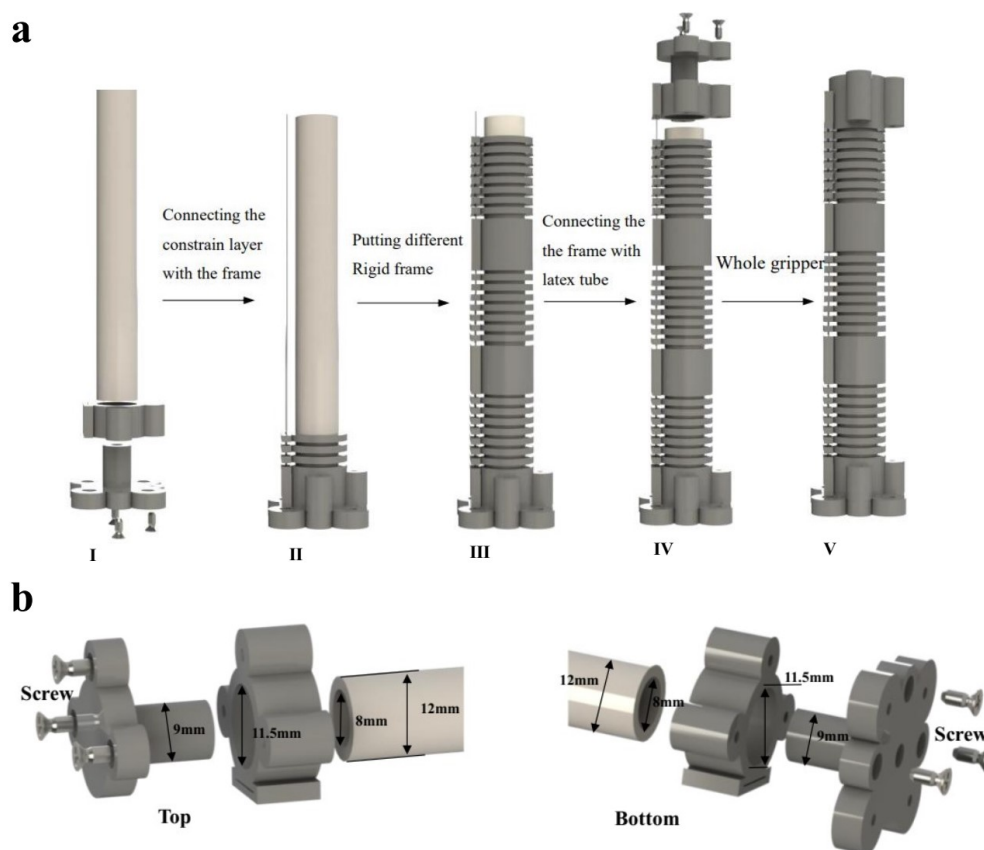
Assembling process of HMAAs. (a) The complete assembling process includes five steps. First, we trim the soft tube to a proper length and then connect one end to a Pedestal Frame for sealing, with a Rigid Frame 3 outside the soft tube. Second, a constrain slab is fixed onto the Rigid Frame 3, which is used to restrict the installation direction of other Rigid Frames and constrain the bending direction of the HMA. Third, several sets of different Rigid Frames are mounted onto the soft tube in a fixed direction along the constrain slab in sequence (for example, 9 pieces of the Rigid Frame 1, 1 piece of the Rigid Frame 2, 9 pieces of the Rigid Frame 1, 1 piece of the Rigid Frame 2, 8 pieces of the Rigid Frame 1, and 1 piece of the Rigid Frame 3 are mounted in sequence). Fourth, a Top Frame is mounted to the other end of soft tube to seal it. Fifth, the HMA is completely assembled. (b) The schematic
